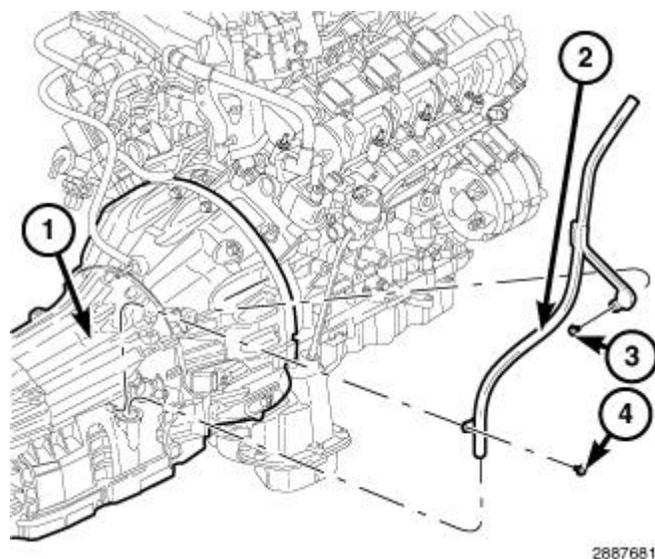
Identifying Transmission, Transmission Fill Tube & Bolts
